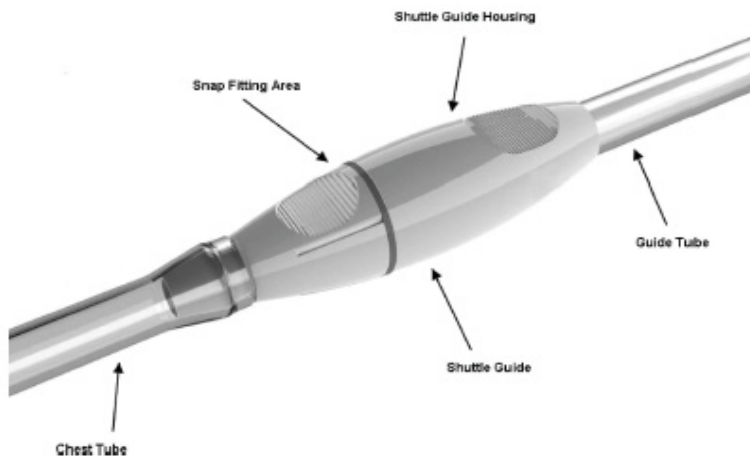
External appearance of shuttle guide part, active tube clearance system.
